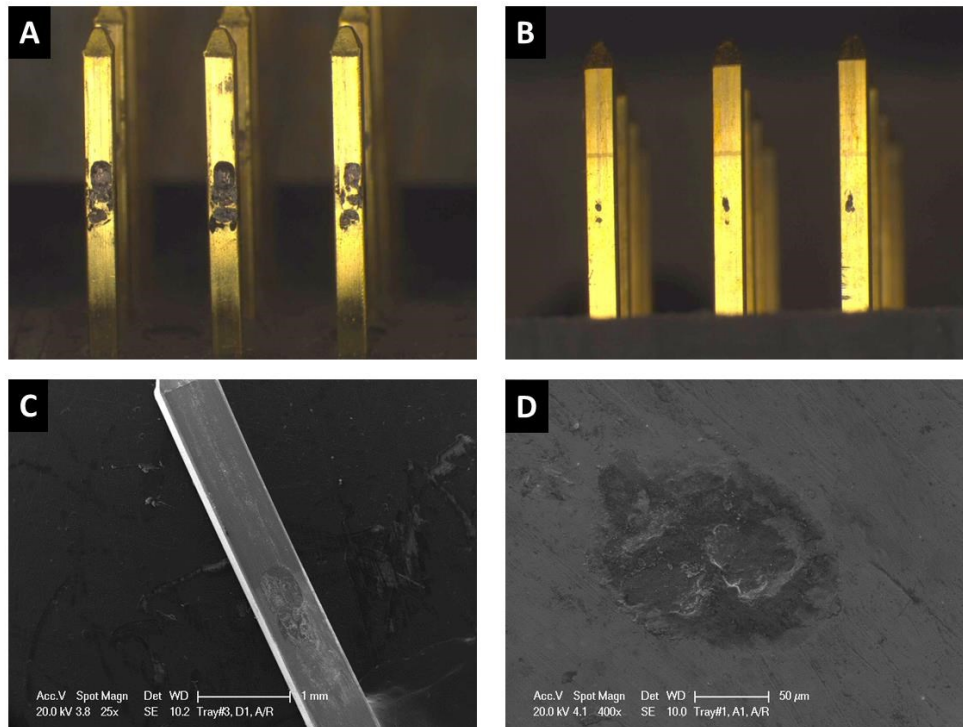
Optical and SEM Micrographs of Fretting Corrosion Initial Samples; A: Fan Tray #1 OM (mag. & scale unspecified); B: Fan Tray #2 OM (mag. & scale unspecified); C: Fan Tray #1 SEM SEI 20 keV, 25x; D: Fan Tray #2 SEM SEI 20 keV, 400x
